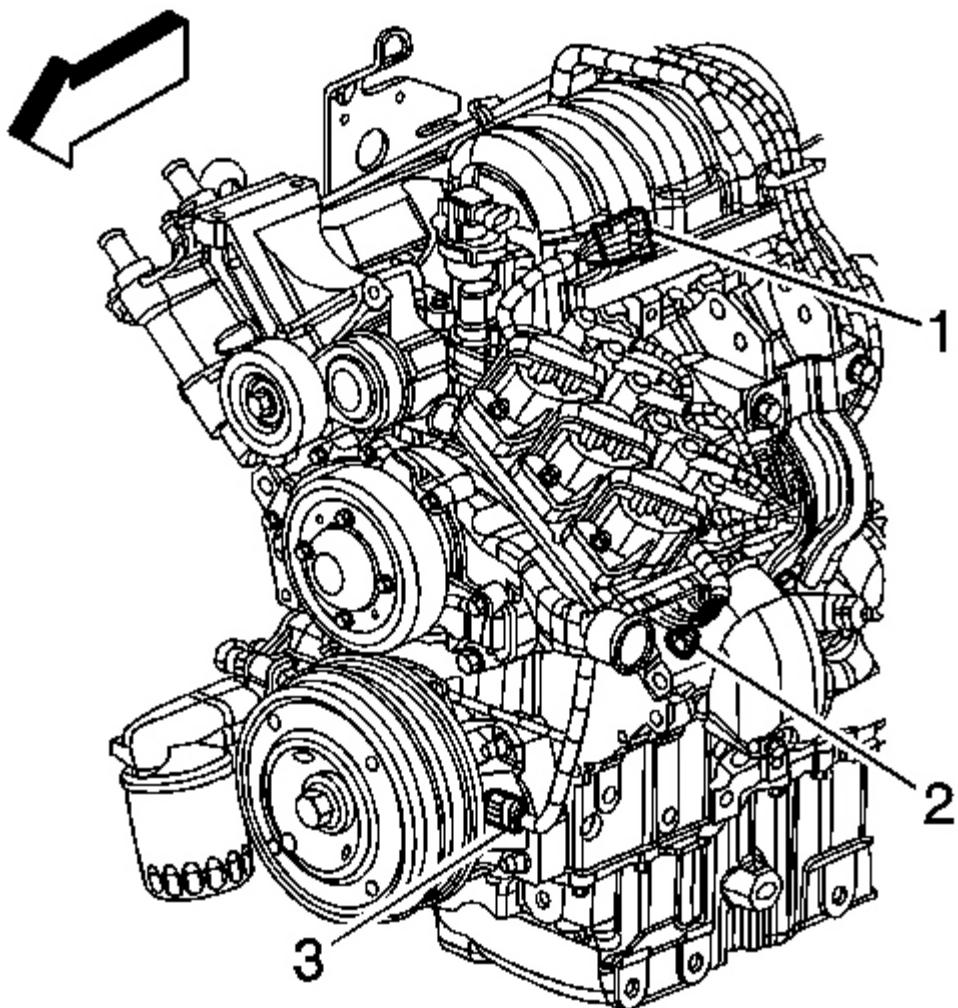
Identifying Crankshaft Position Sensor Shield
